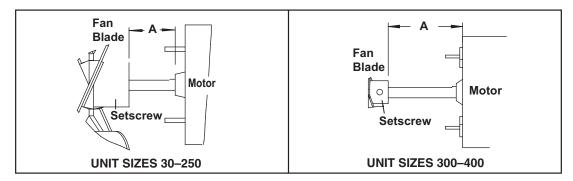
Fan and Motor Spacing (Refer to Table 24)
